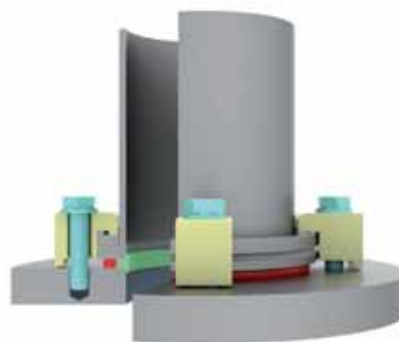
ISO-K flange mounted on base plate with centering ring and claw clamps
